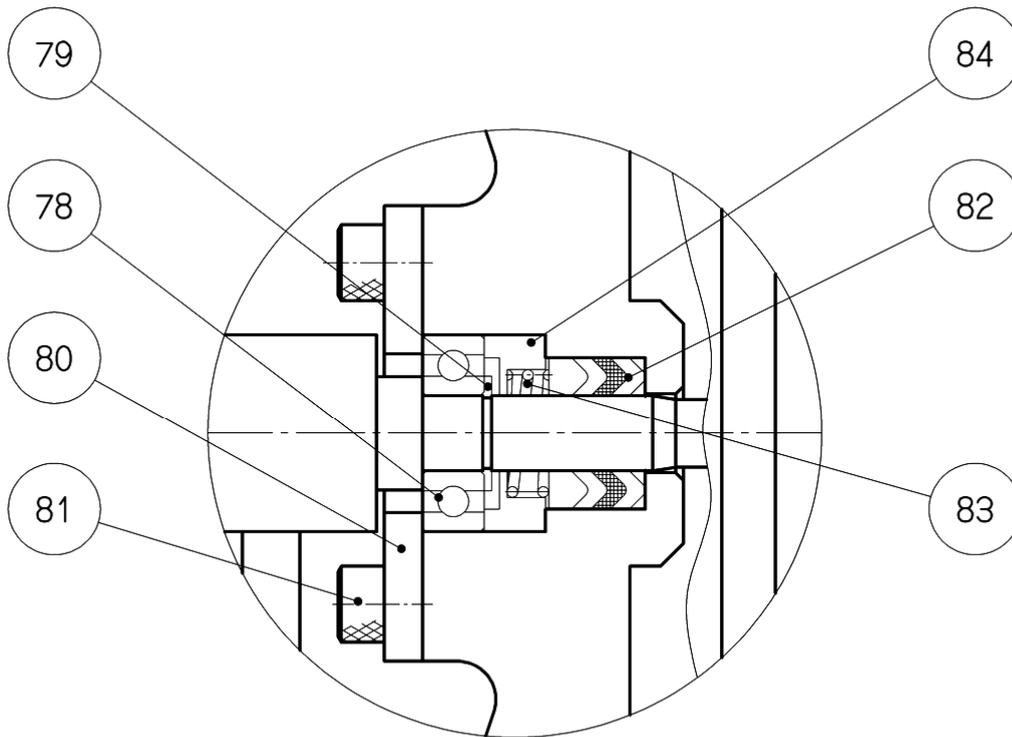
2520SSC Assembly Sectional View (Horizontal)
